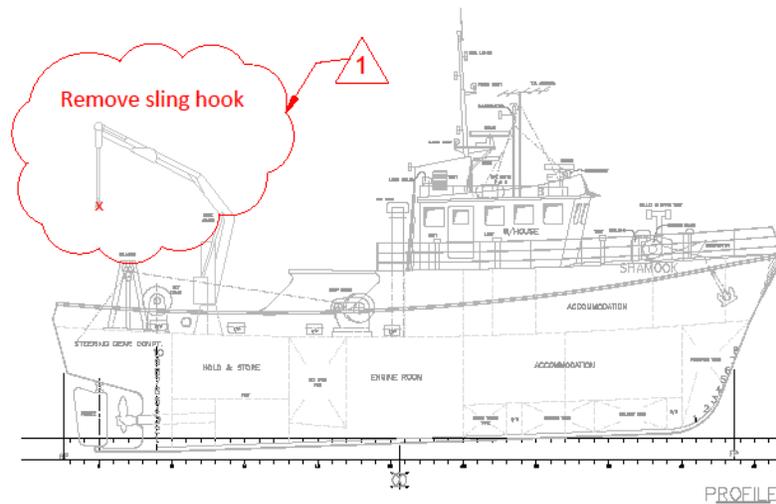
Example of “Remove” mark-up to the content of a technical drawing in the drawing area
